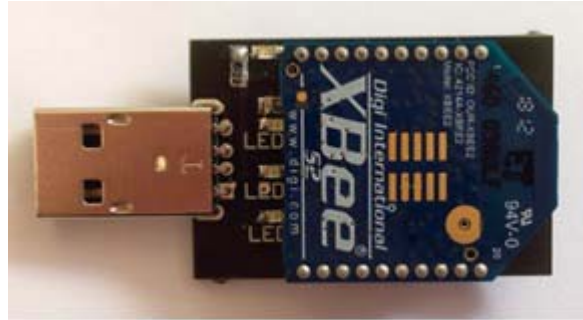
The final PCB with XBee[®] module been attach on.
